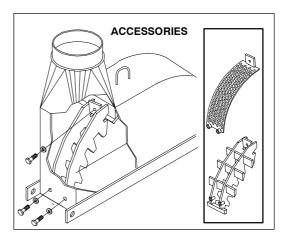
Installing the screen, twig breaker, and high-power breaker
